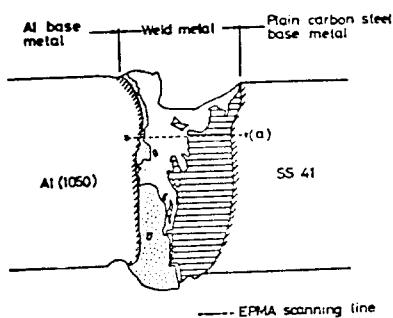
Crossectional illustration of butt welded joint of Al and SS41 sheets with 0.3mm width Ag insert metal.
